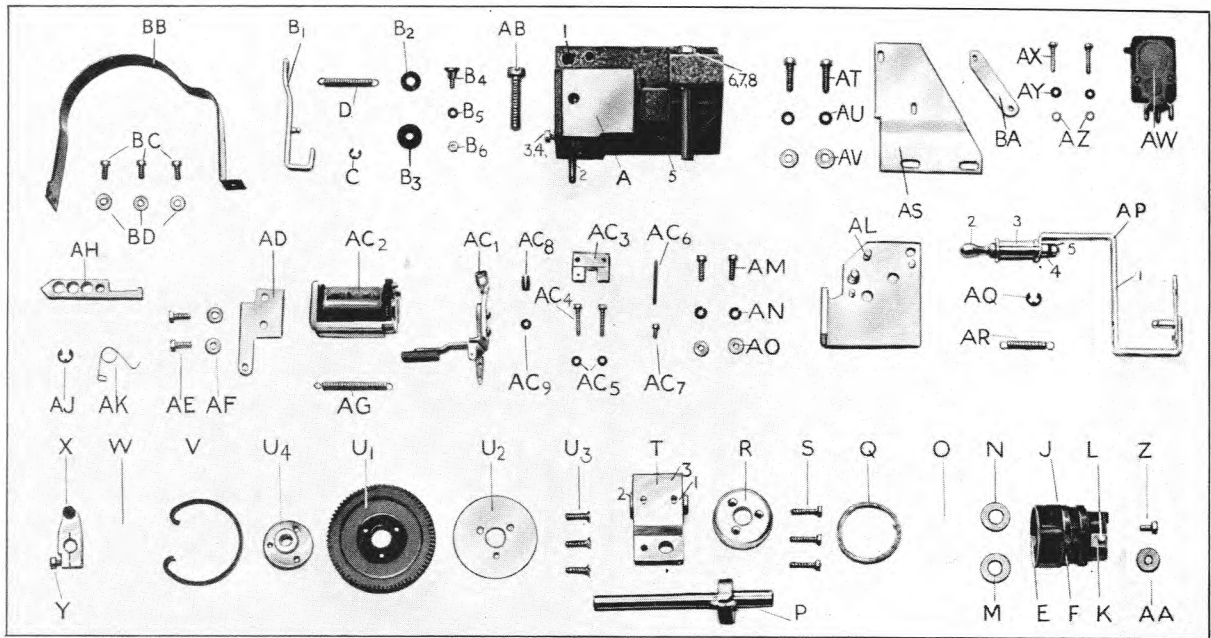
TAPE CONTROL UNIT S4066 (Components)
